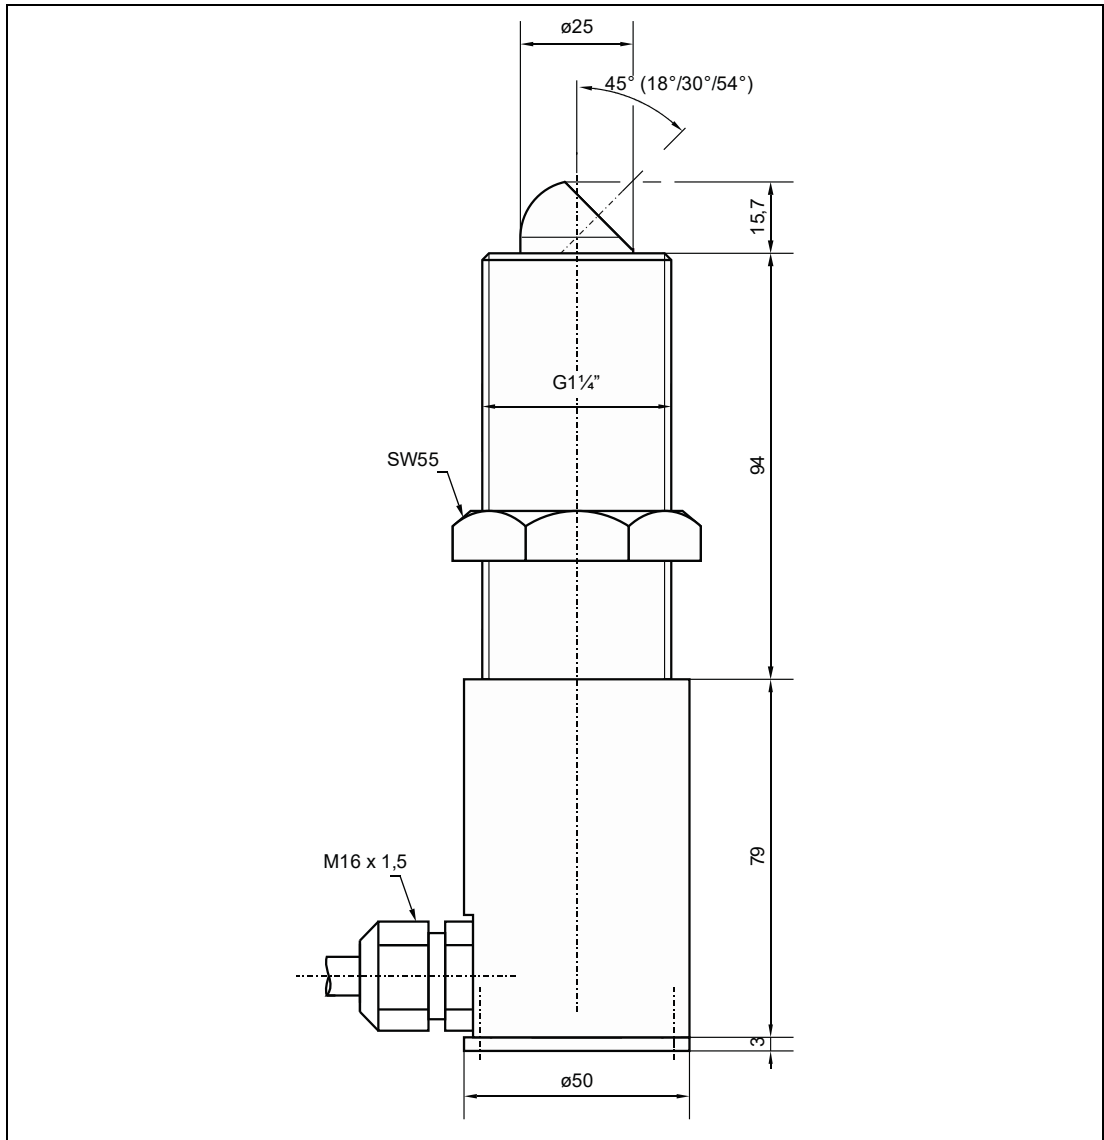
Dimensions screw-in sensor, type NOS-V2E00
